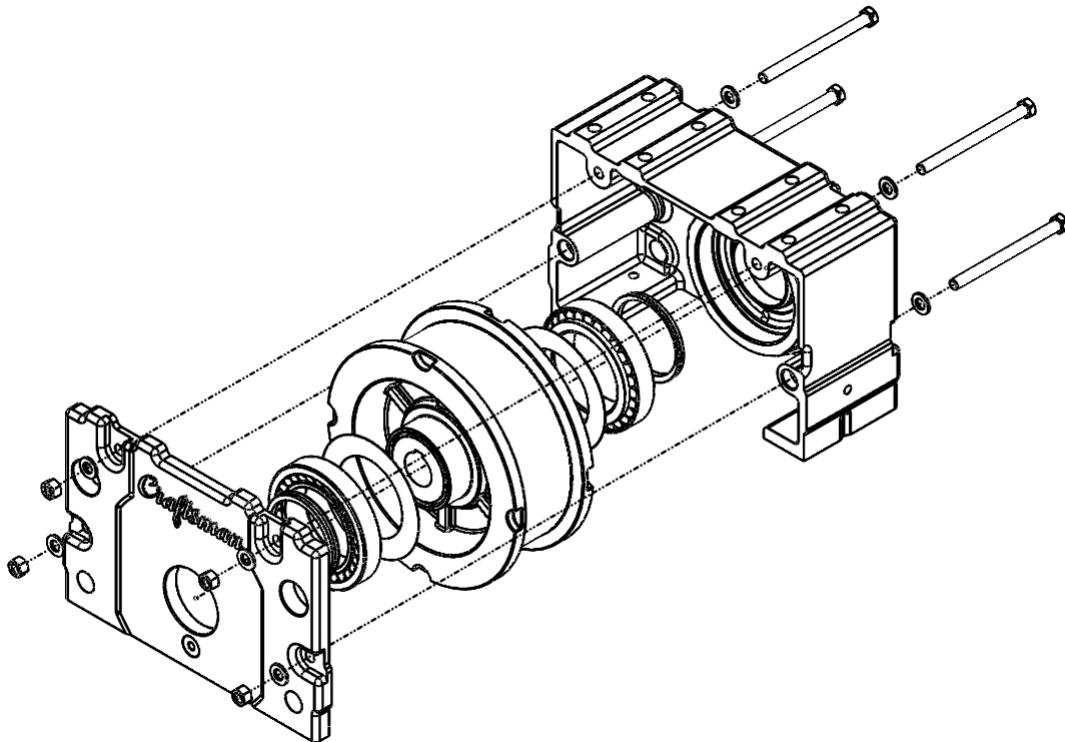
Exploded view of Wheel block System CRWB 250 TO 500
